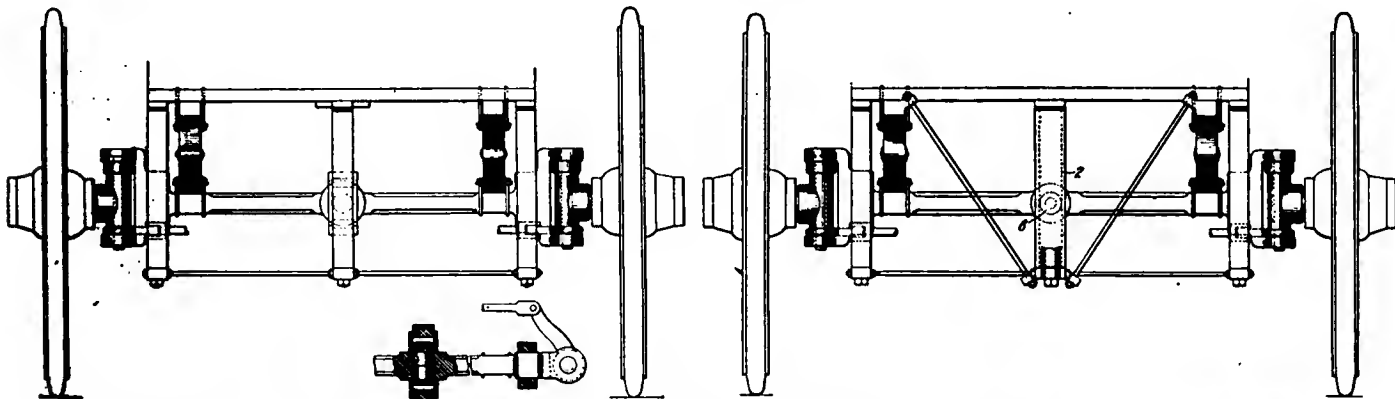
DETAILS OF MADDEN PEDESTAL AXLE GUIDES FOR RUNNING GEARS.
